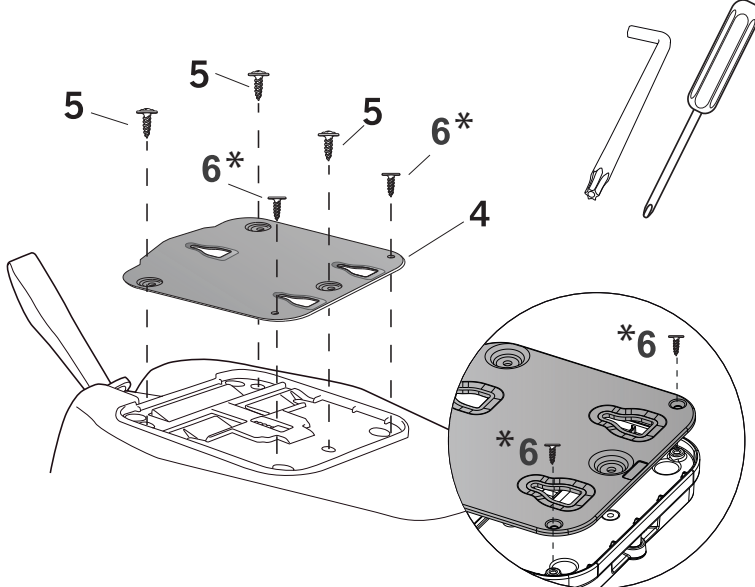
PLATE INSTALLATION / MONTAJE PLETINA / MONTAGE HALTEPLATTE /
